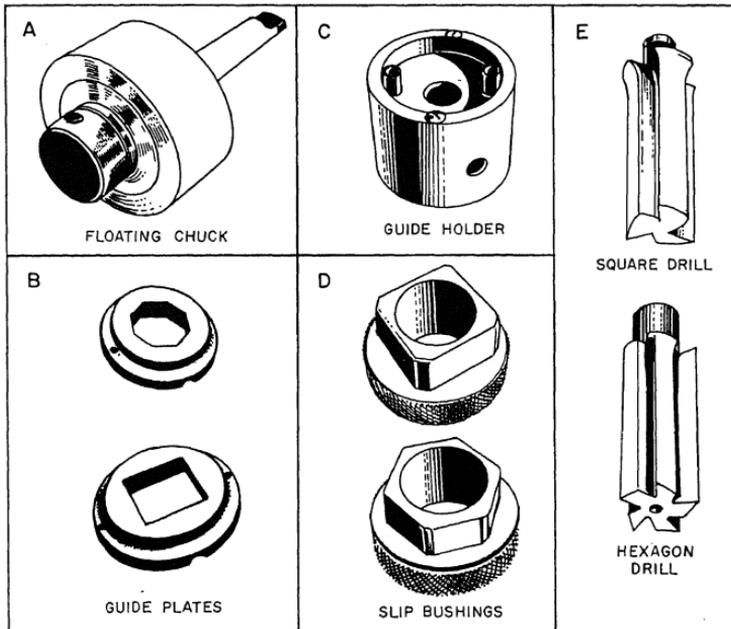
Equipment for drilling angular holes. A. Chuck; B. Guide plate; C. Guide holder; D. Slip bushing; E. Angular drill.
